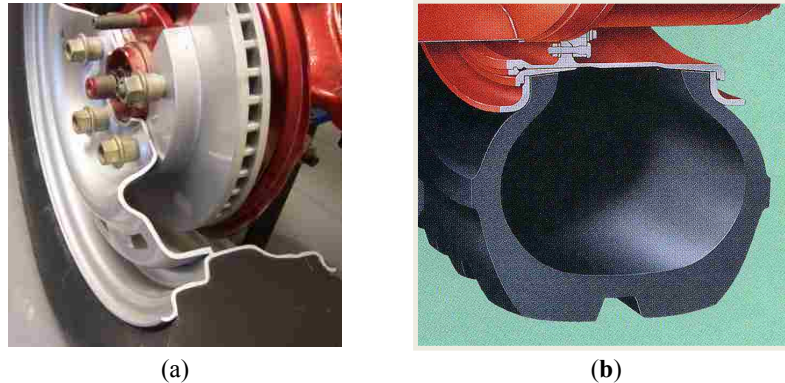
A single-piece wheel (a) and a five-piece wheel (b) [5].
